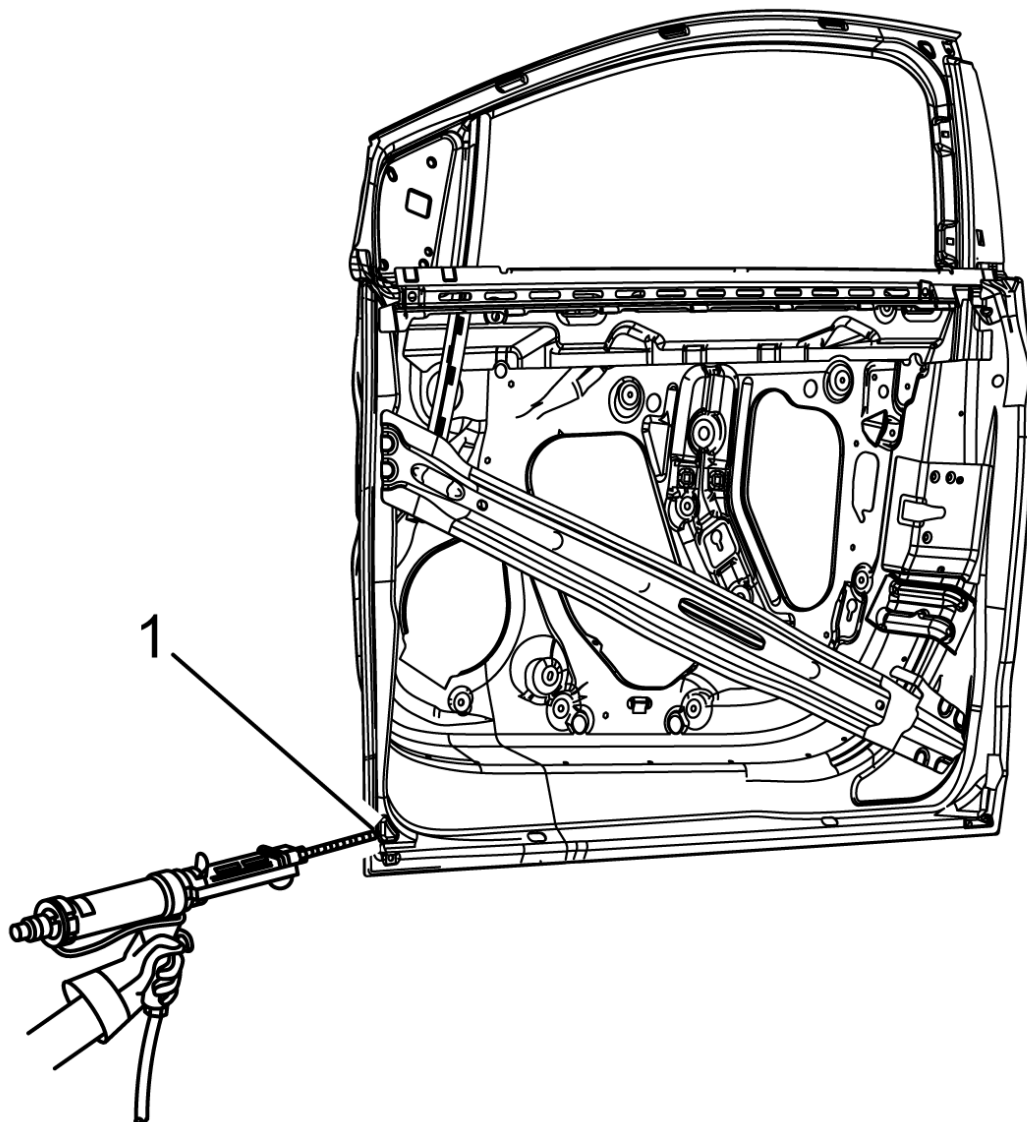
Apply Bead Of Metal Panel Bonding Adhesive To Mating Surfaces
